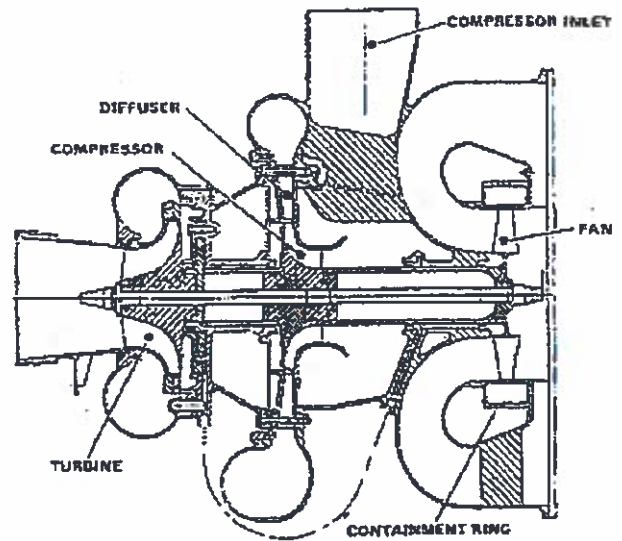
767/757 Foil Bearing Air Cycle Machine
